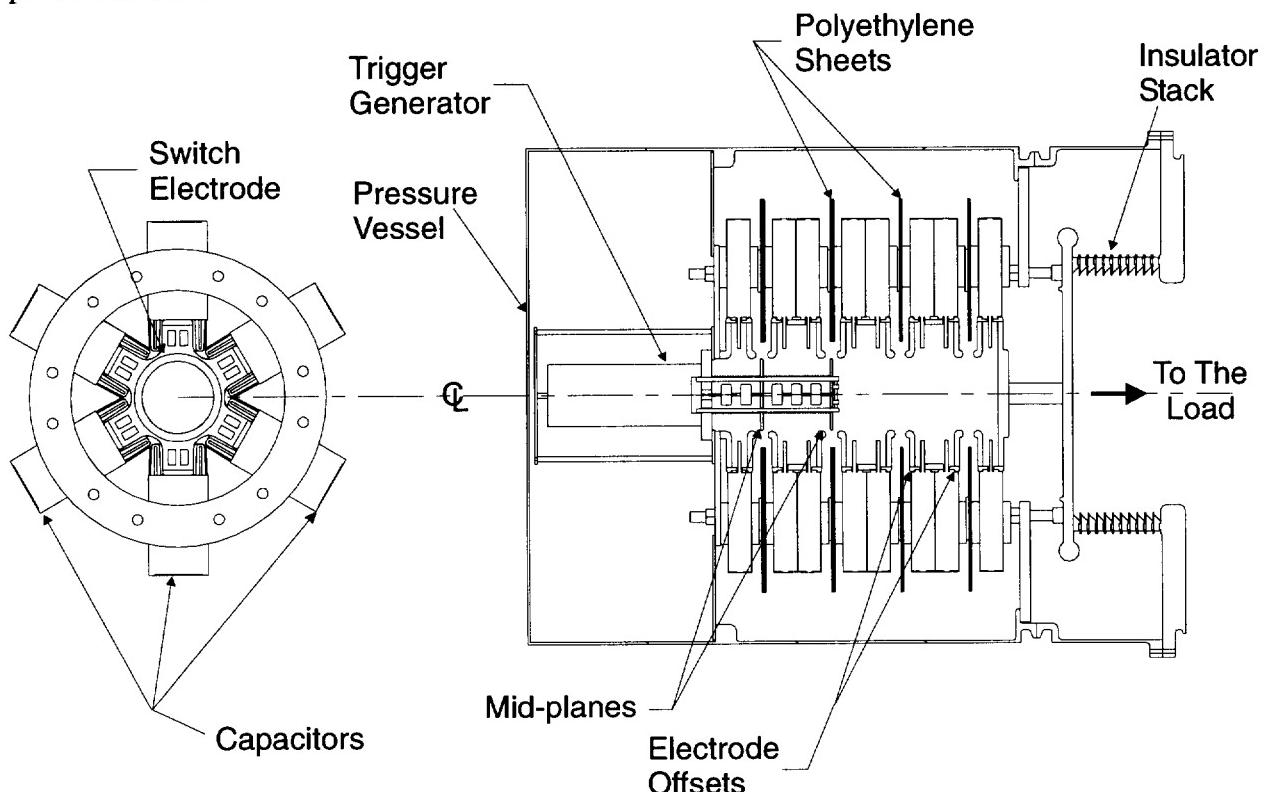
Diagram Showing the End and Side Views of the Marx Generator.
